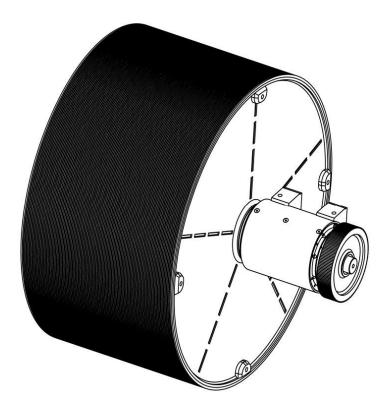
Detail of the drive drum, support and toothed pulley assembly
